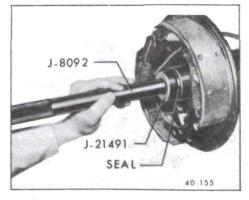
Axle Shaft Bearing and Seal Installer
